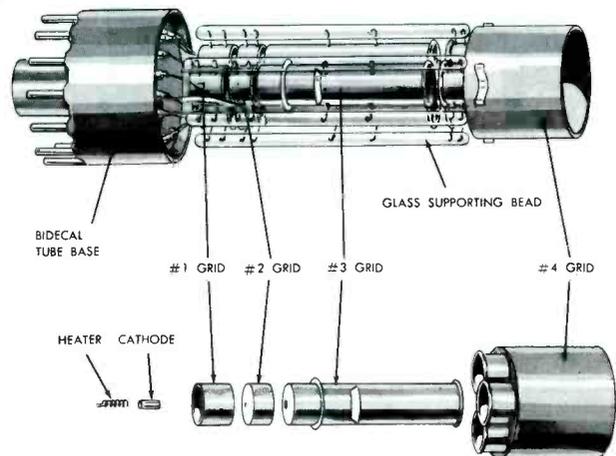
Three-Gun Assembly with an Exploded View of One of the Guns.
